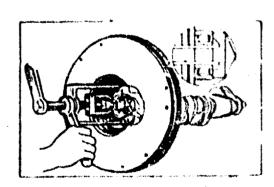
Pulling the transmission drive shaft hearing with a crank puller
